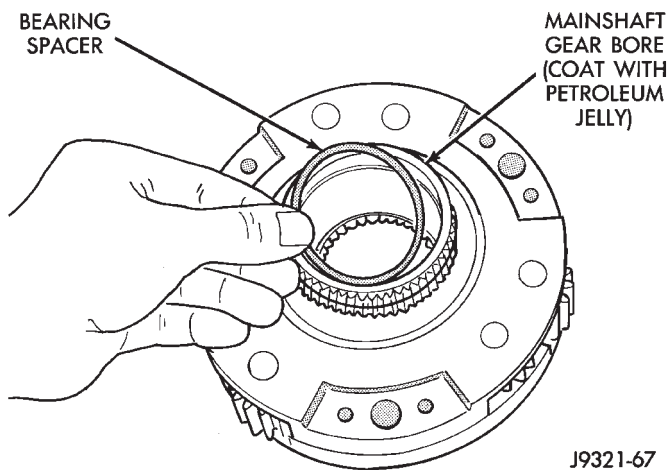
Installing Bearing Spacer In Mainshaft Gear
